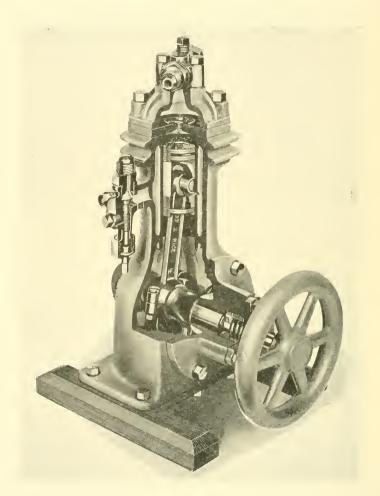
SECTIONAL VIEW OF RICE COMPRESSOR.
